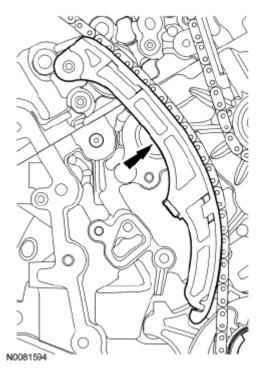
Locating Primary Timing Chain Tensioner Arm Courtesy of FORD MOTOR CO.
